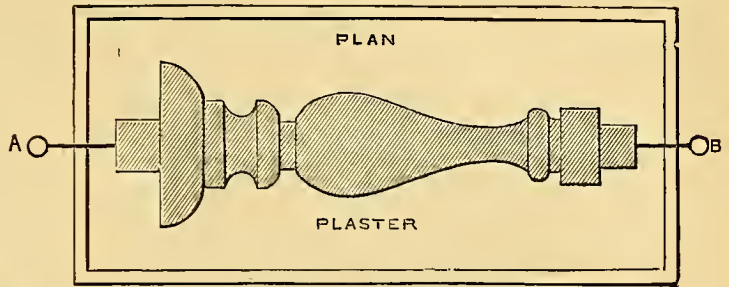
SIMPLE TURNED PILLAR—PLAN.
